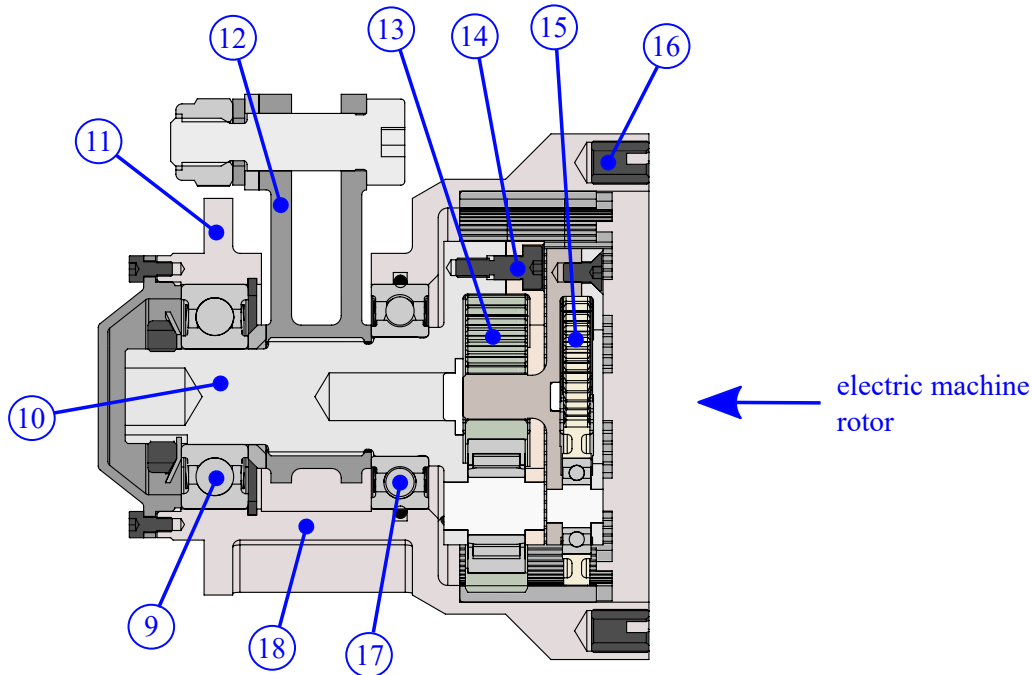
Side cut view of the gearbox assembly. Ball bearing (9), input shaft (10), interface with the mounting flange (11), lever (12), first stage (13), calibrated screw [x3] (14), second stage (15), threaded insert [x6] (16), ball bearing (17), casing (18).
